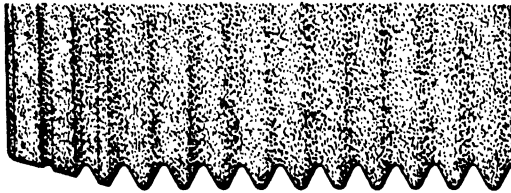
MULTI-RIB WHEEL WITH TAPER ON LEADING EDGE
